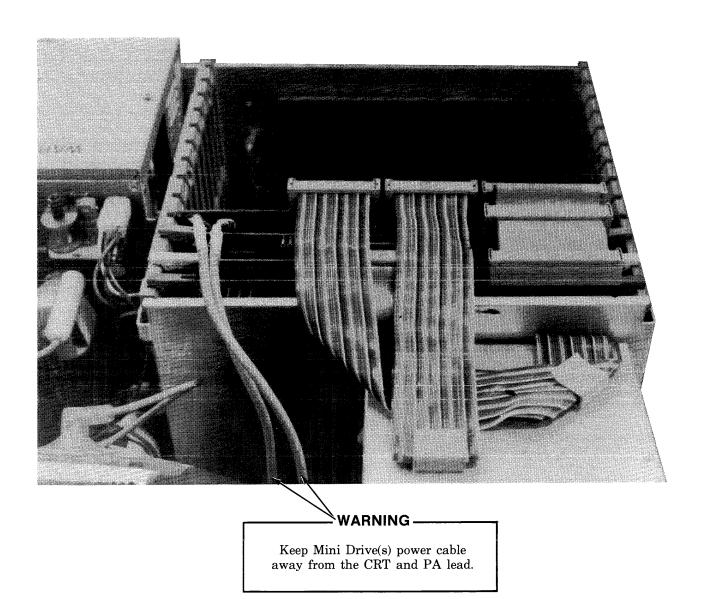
Mini Drive Ribbon Cable Position and Fold
